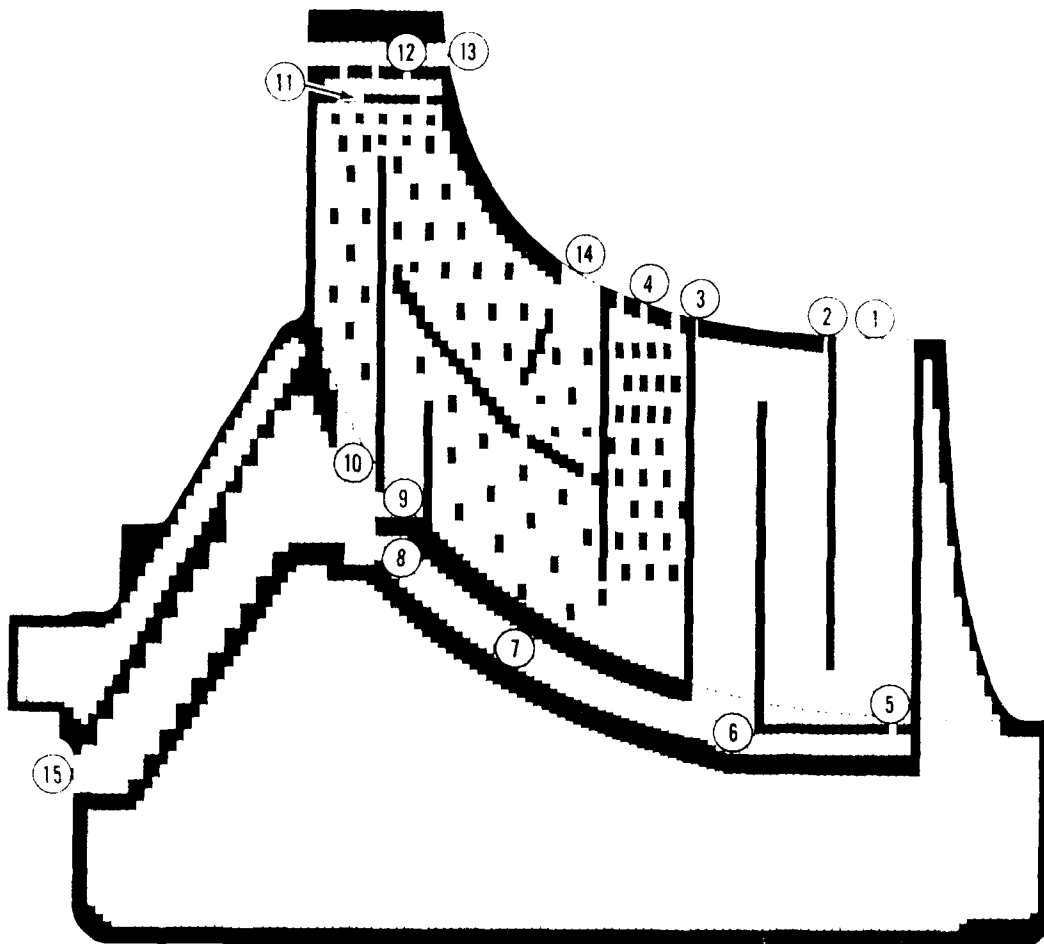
Hole Geometry (See Table 5 for Hole Sizes).
